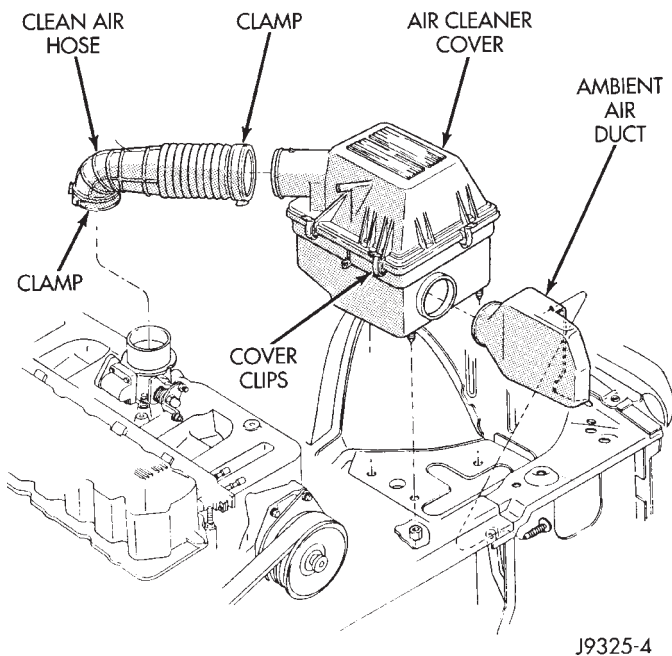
Air Cleaner—4.0L 6-Cylinder Engine—Typical
